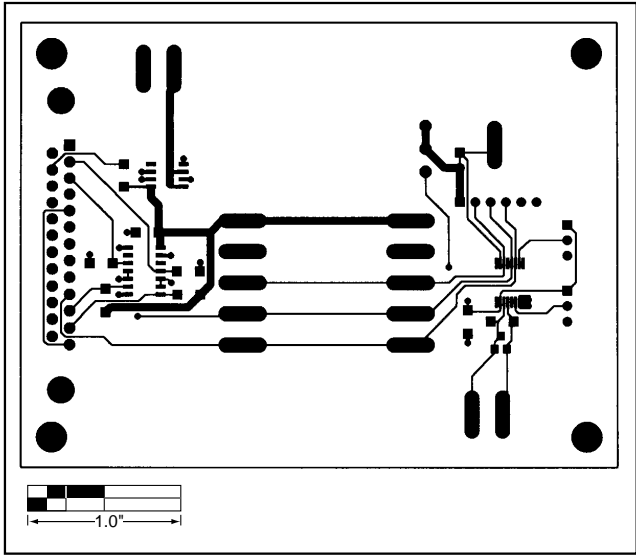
MAX1617 EV Kit PC Board Layout—Component Side
